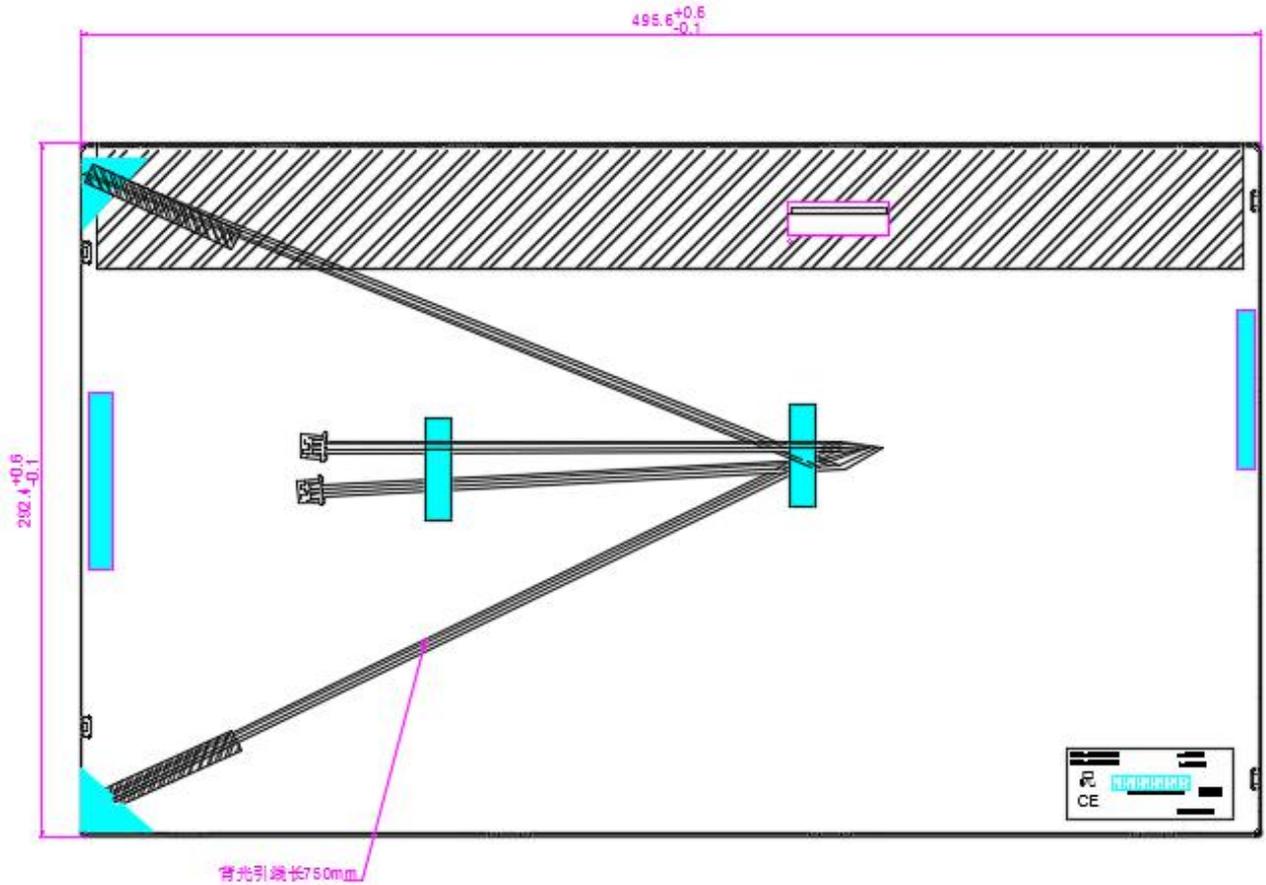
TFT-LCD Module Outline Dimensions (Front view)
